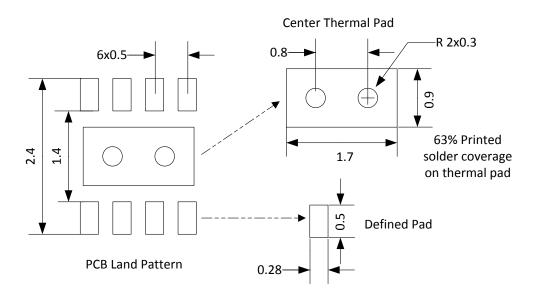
· 8 Pin Plastic DFN 2x2mm Dual Exposed Pad Package Footprint
